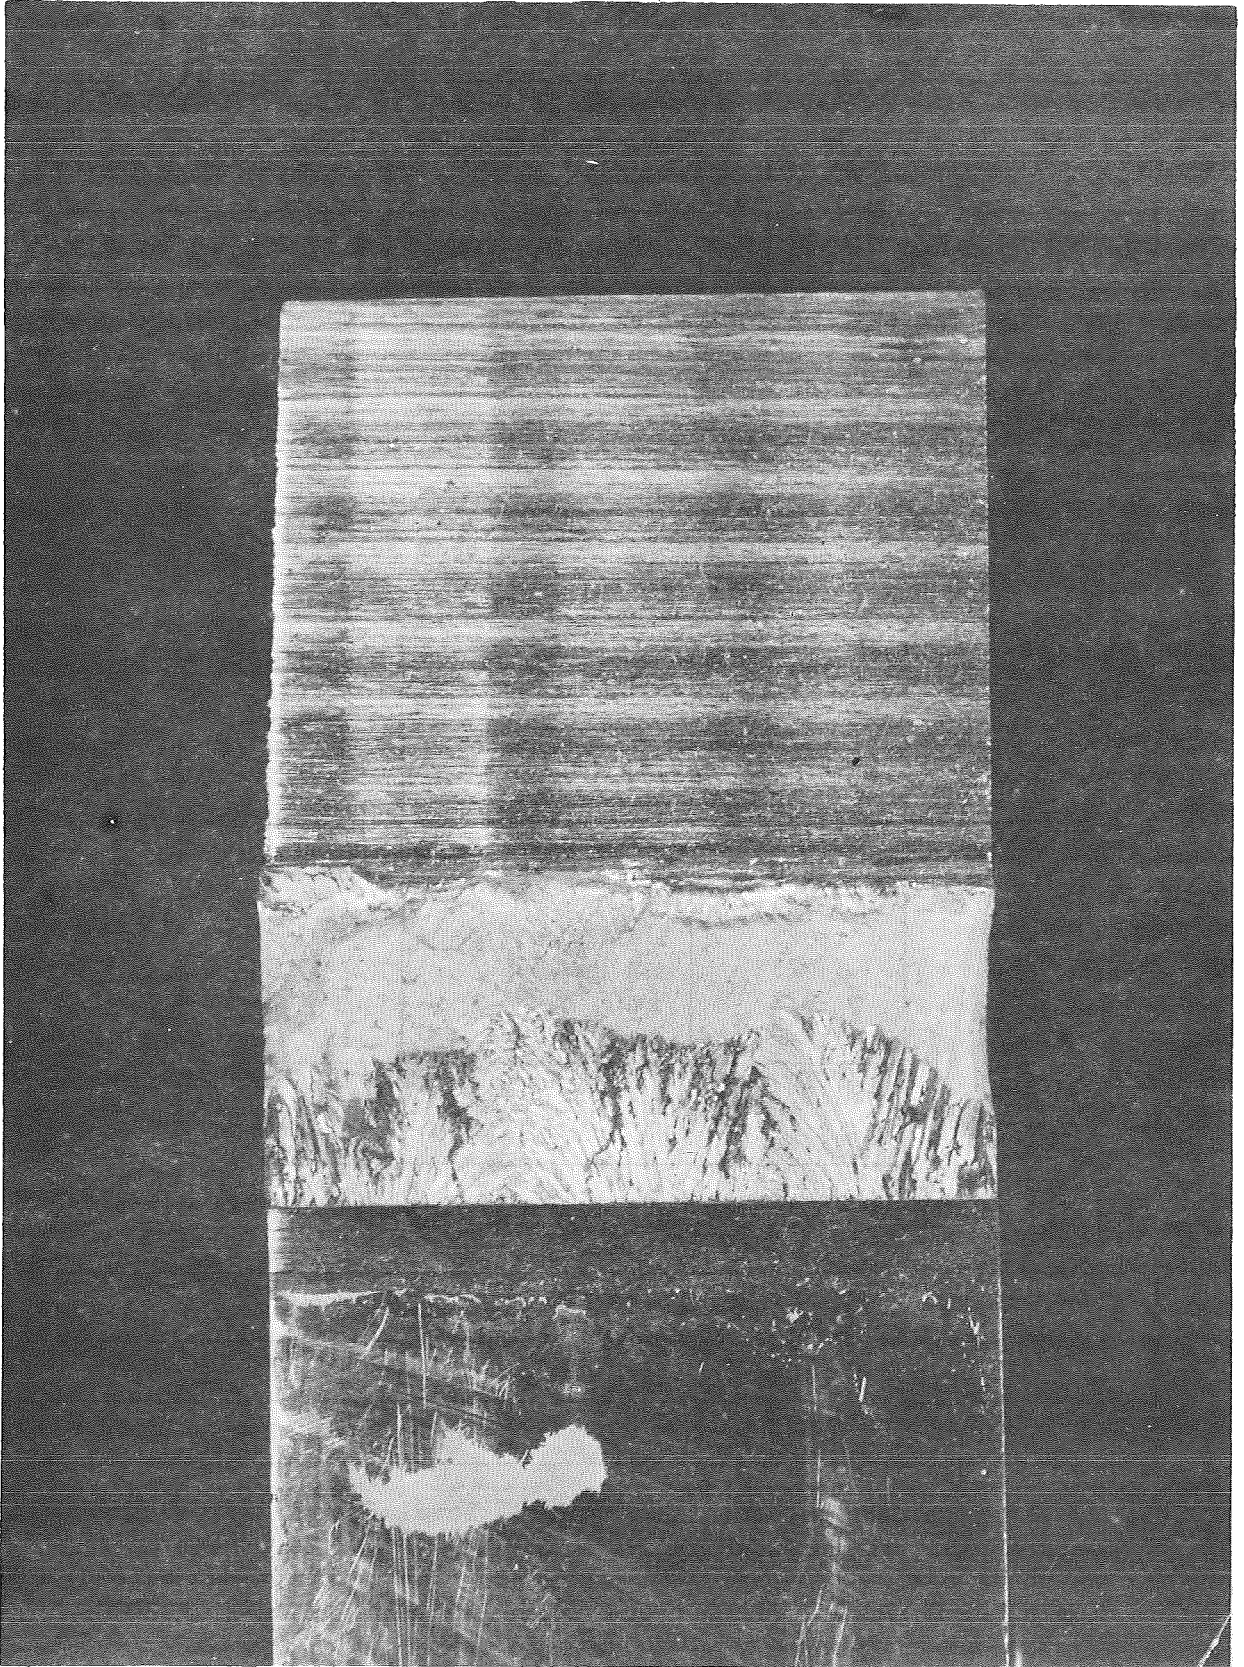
Fracture Surface of Sustained-Load, Welded X7007-T6 Specimen
